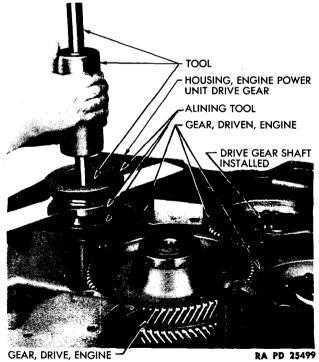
Driving Engine Drive Gear Shaft Into Position In Housing
